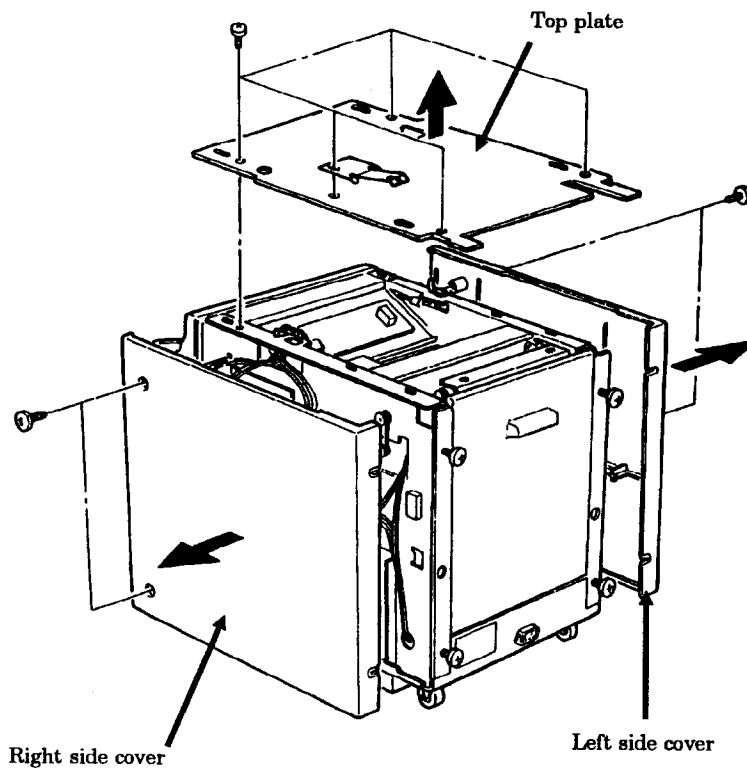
REMOVING THE PAPER HANDLER/STACKER
